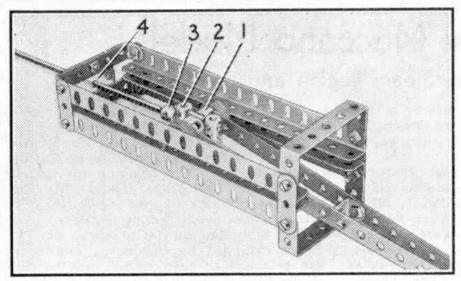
One of many methods of constructing a crosshead and slide bars for a model steam engine.
